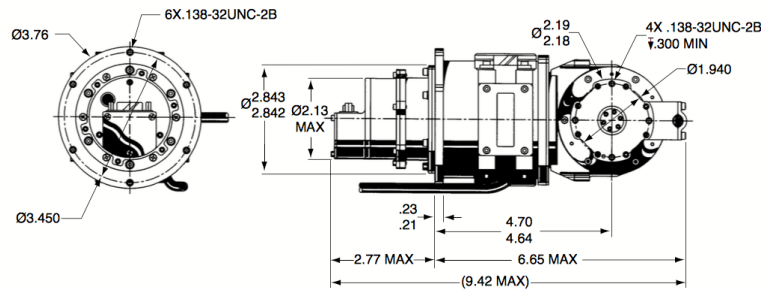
Type 11 Solar Array Drive Assembly, used to turn the solar panels to the Sun [76].
